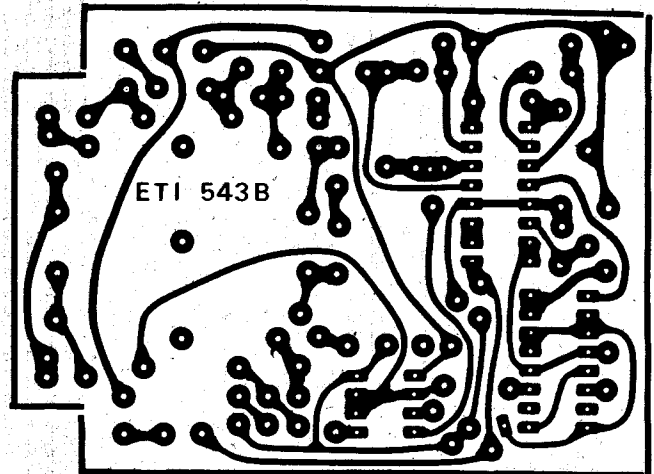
Printed circuit pattern for the timing board. Full size 83 x 61mm
